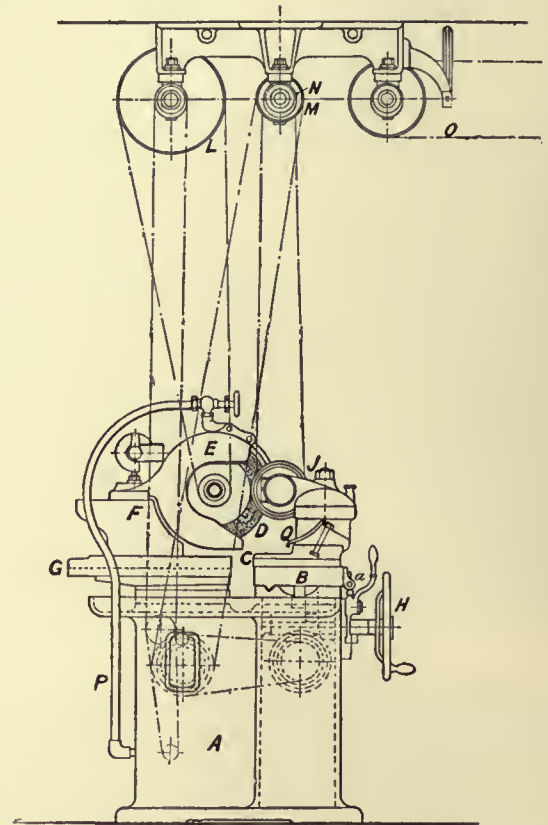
Universal Grinding Machine, 7 in. centres; 3 ft. 6 in. between centres. (H. W. Ward & Co., Ltd., Birmingham.)
